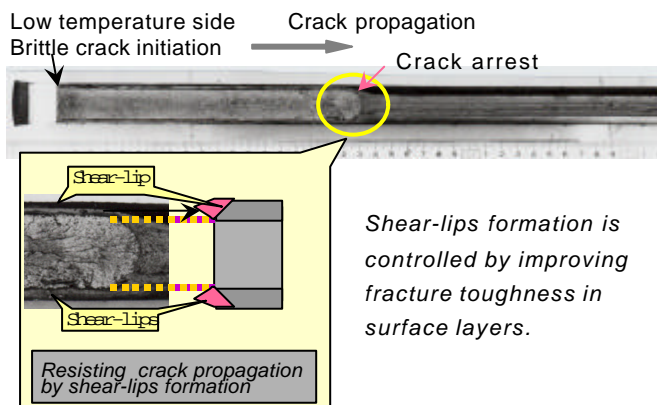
Fracture surface of standard ESSO test specimen for SUF steel plate
